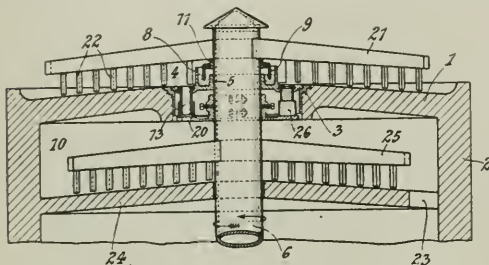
AUTOMATIC CHARGING DEVICE FOR ROASTING FURNACES
